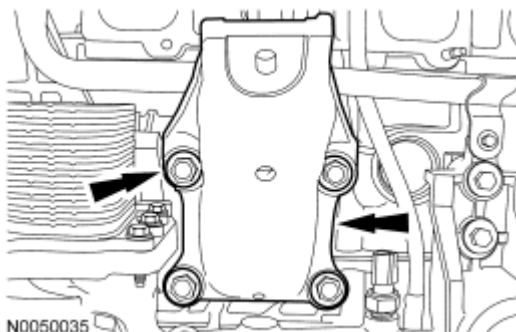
Identifying LH Engine Support Insulator Bracket Bolts
